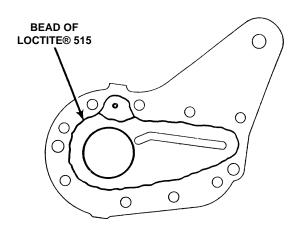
SEAL HOUSING (20-25 HP)
